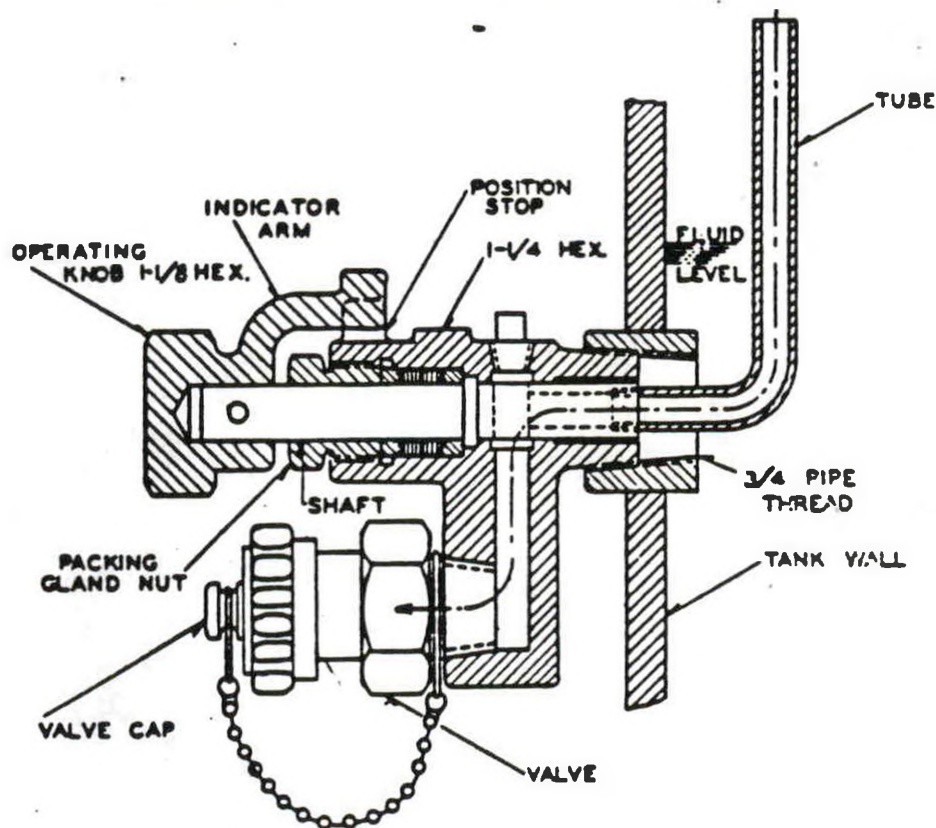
Westinghouse Rotary Type Sampling Valve
